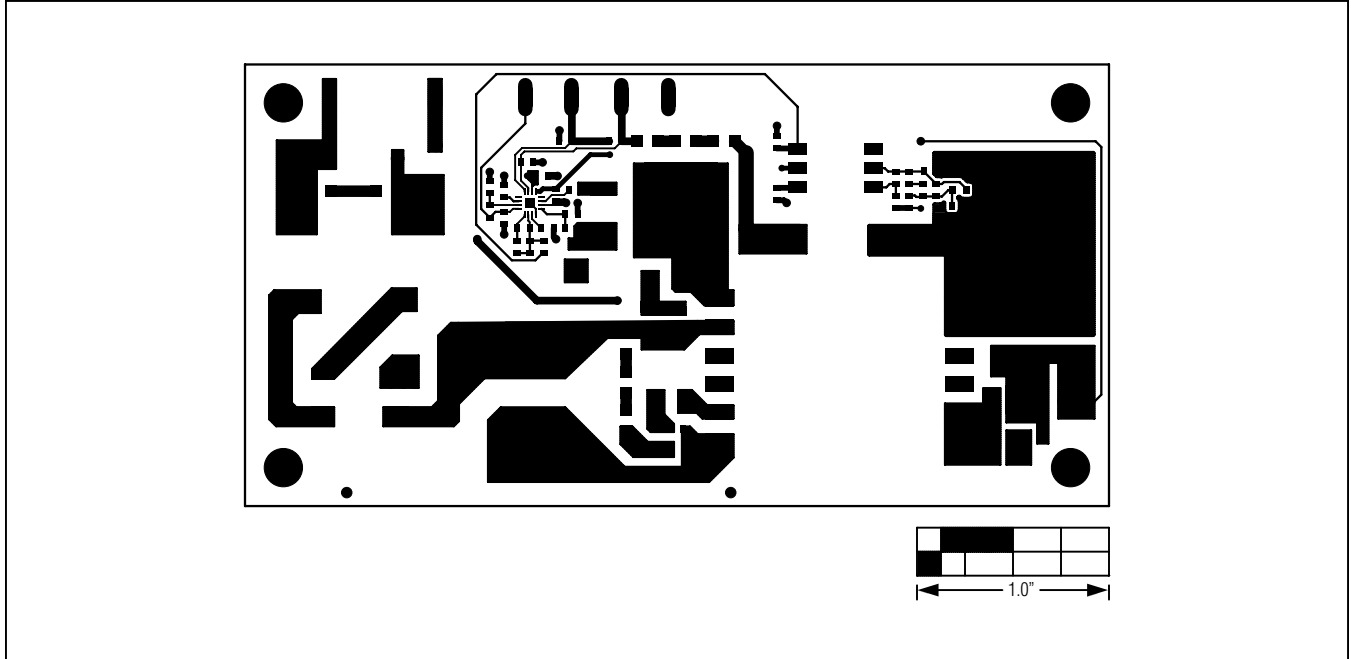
MAX17595 EV Kit PCB Layout—Component Side
